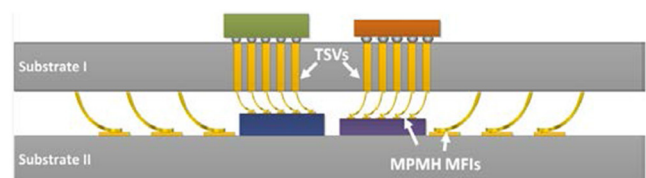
Assembly on a package with embedded chips using multi-pitch multi-height mechanically flexible interconnects (MPMH MFIs).
